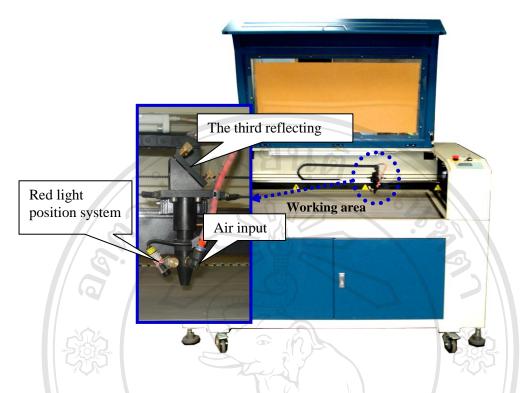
CO₂ laser machine (SF960 Jinan Senfeng Technology Co., LTD, China)
